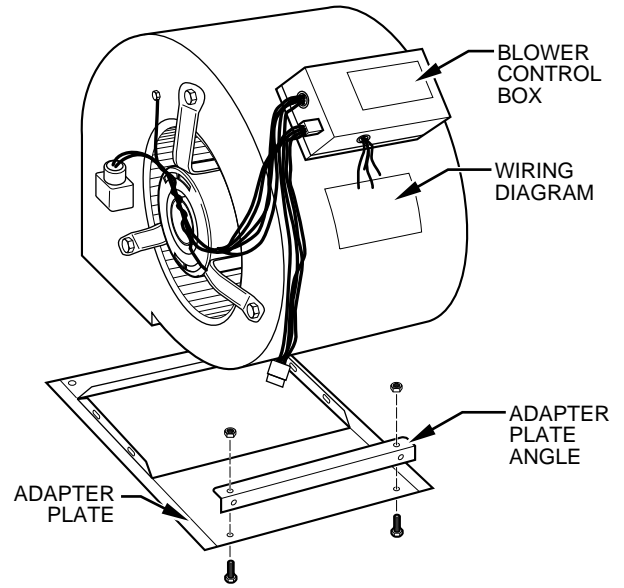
Attaching KMABA05013TE or KMABA06014TE Blower to 3500/EB Adapter Plate and Adapter Plate Angle
